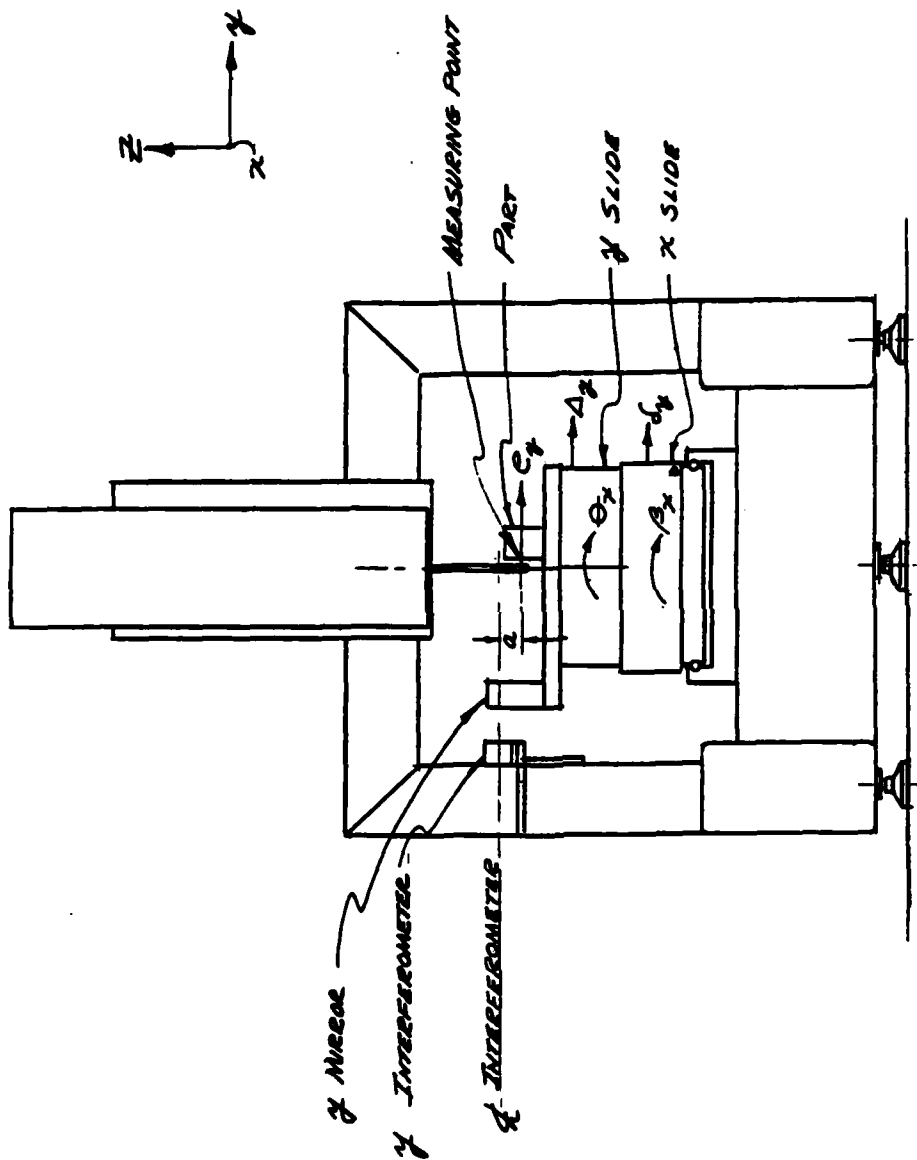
Front View - AGTCMD Geometric Machine Errors
